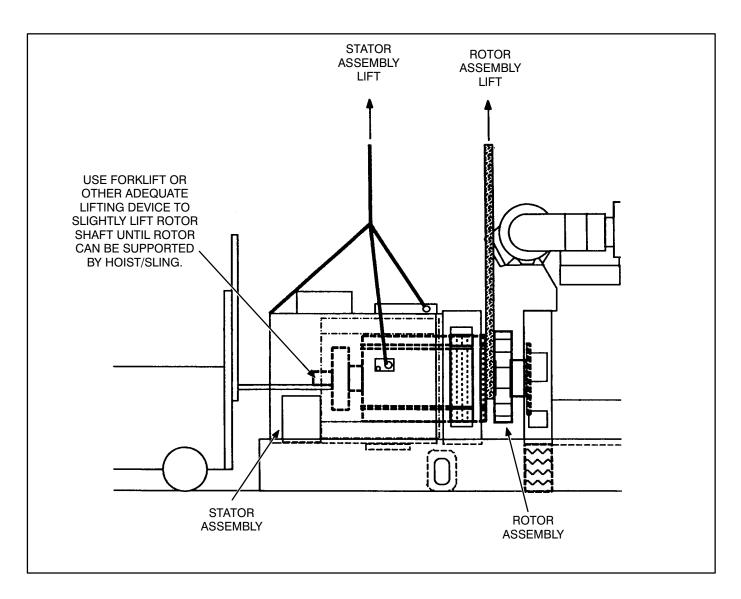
REMOVING STATOR ASSEMBLY
